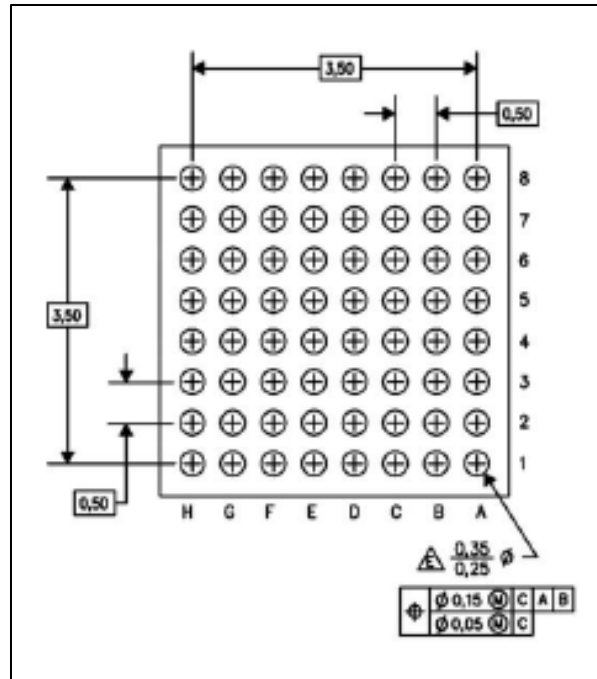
1 Typical square package with 8 X 8 array of solder balls
